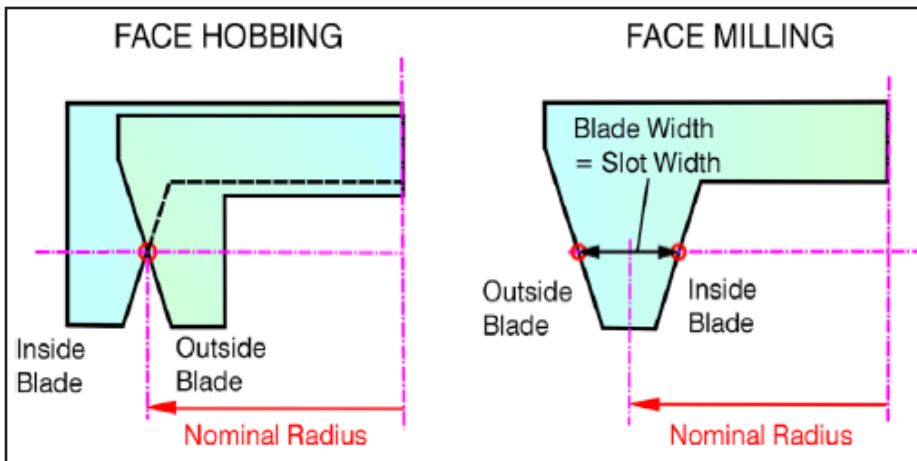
Blade orientation — left for face hobbed, and right for face milled bevel gears.
